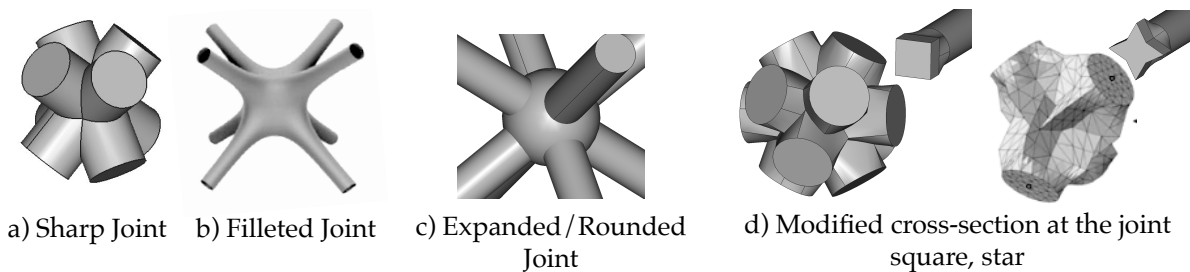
Representative joint-geometry modifications used in lattice design studies. (a) Sharp joint, author’s schematic. (b) Filleted joint adapted from Casata et al. [24]. (c) Expanded/rounded joint, author’s schematic. (d) Modified cross-section at the joint inspired partly by Portela et al. [12], showing examples such as square and star-like local joint sections. Together, these examples illustrate that joint geometry can be modified in several qualitatively different ways even when the surrounding lattice topology remains unchanged.
